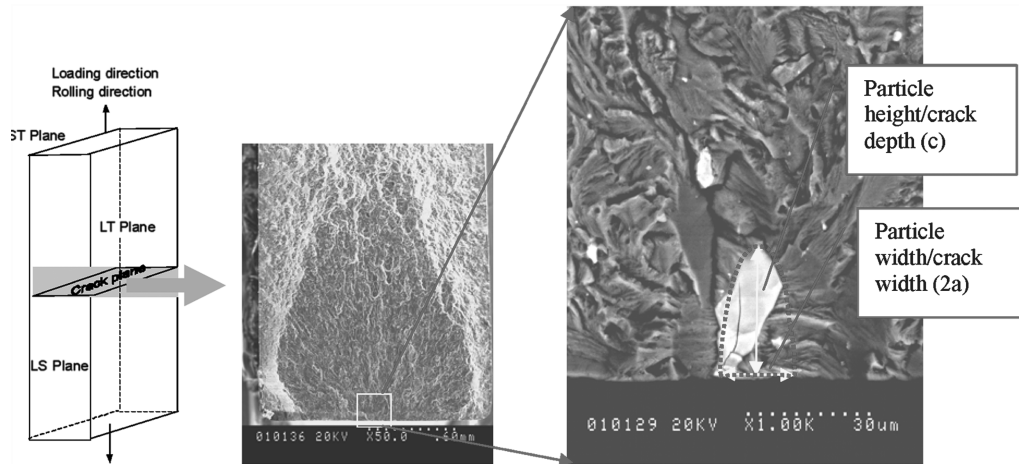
Fracture surface and crack-nucleating-particle-based crack model (ST denotes the short transverse plane).
